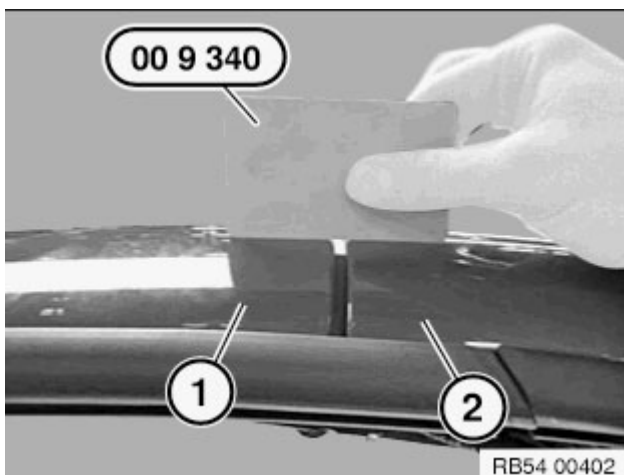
Checking Gap Dimensions Using Special Tool (00 9 340)
